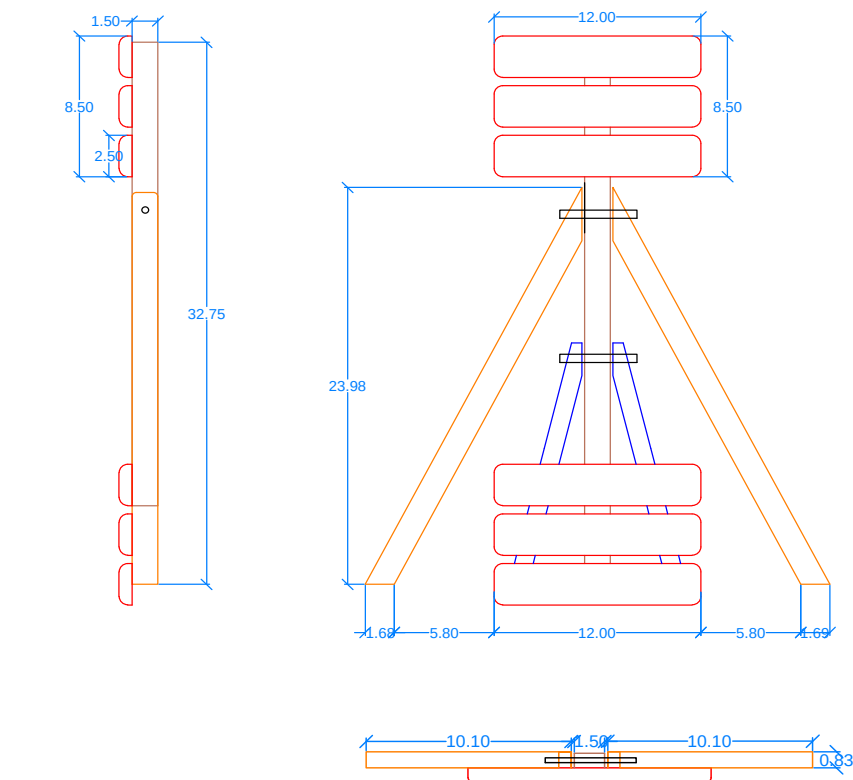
Side elevation, front elevation and plan, when chair is in closed condition
